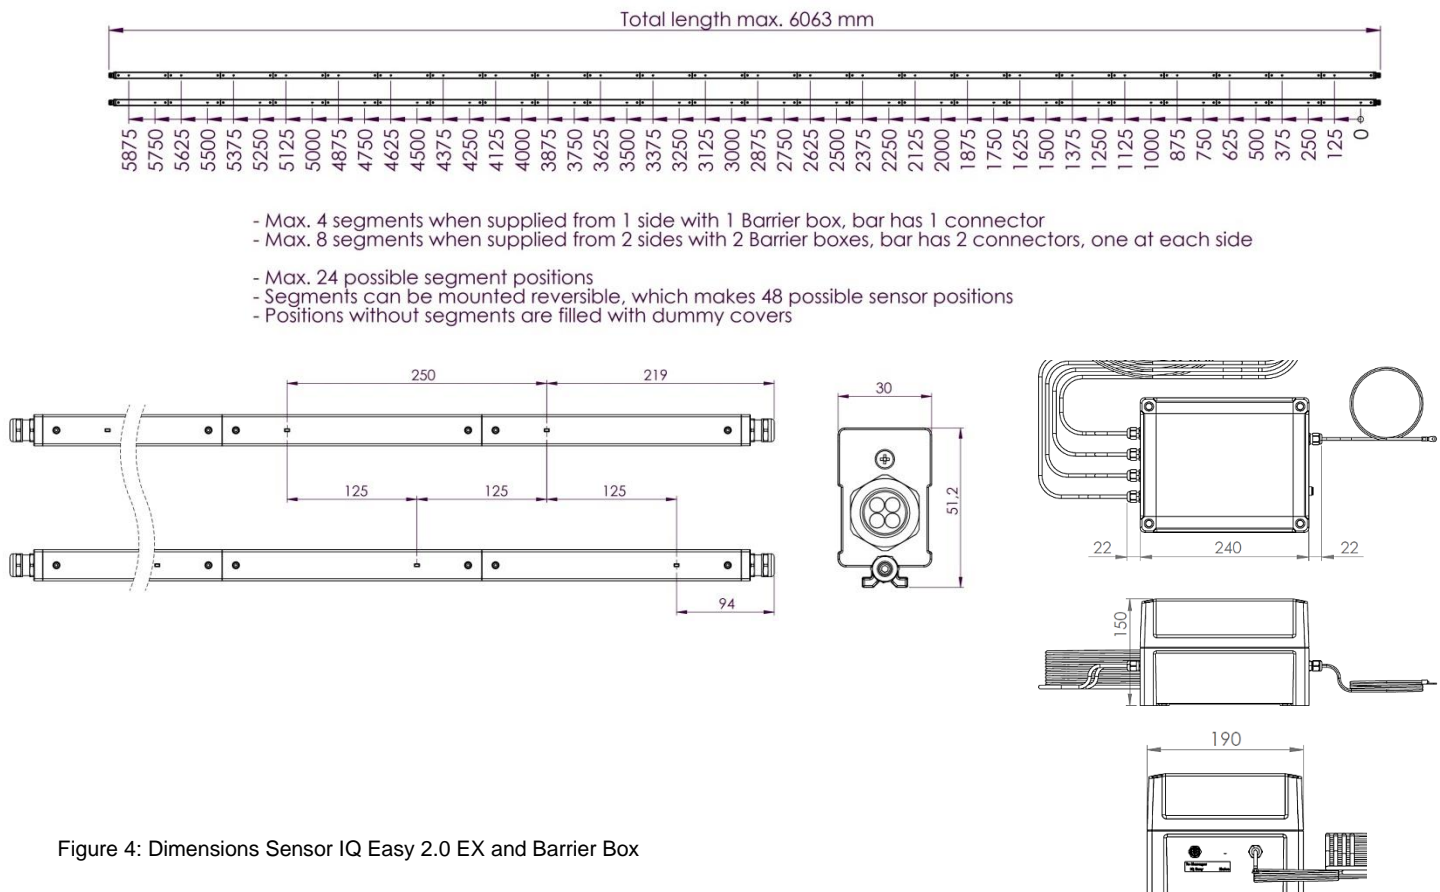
Dimensions Sensor IQ Easy 2.0 EX and Barrier Box
